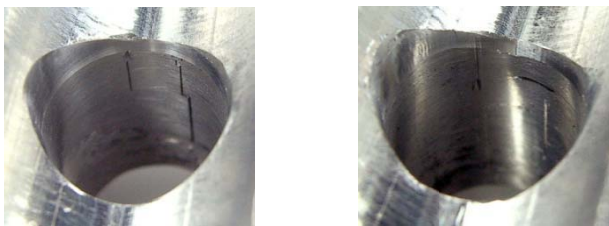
Exit burr of the intersecting hole (AL6061-T6).
